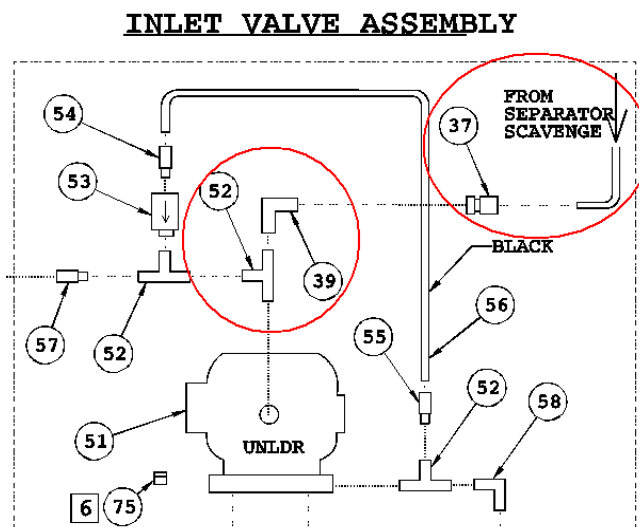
Air Intake location of scavenge line. Plug installed in the side of the compressor. Additional elbow located at the inlet valve assembly for scavenge line piping.
